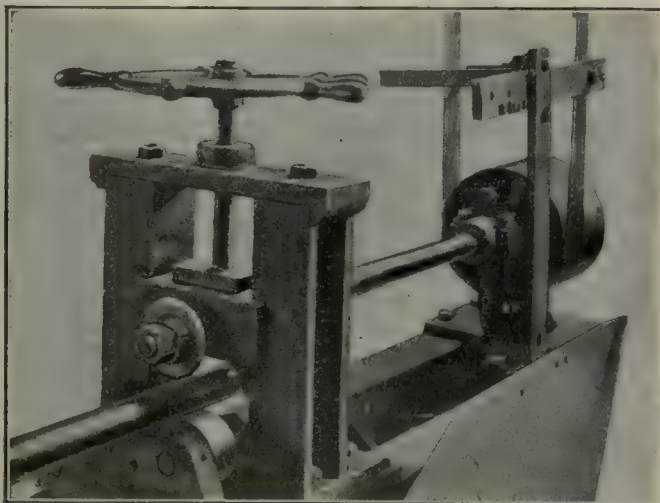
MACHINE FOR CUTTING OFF FLUES
